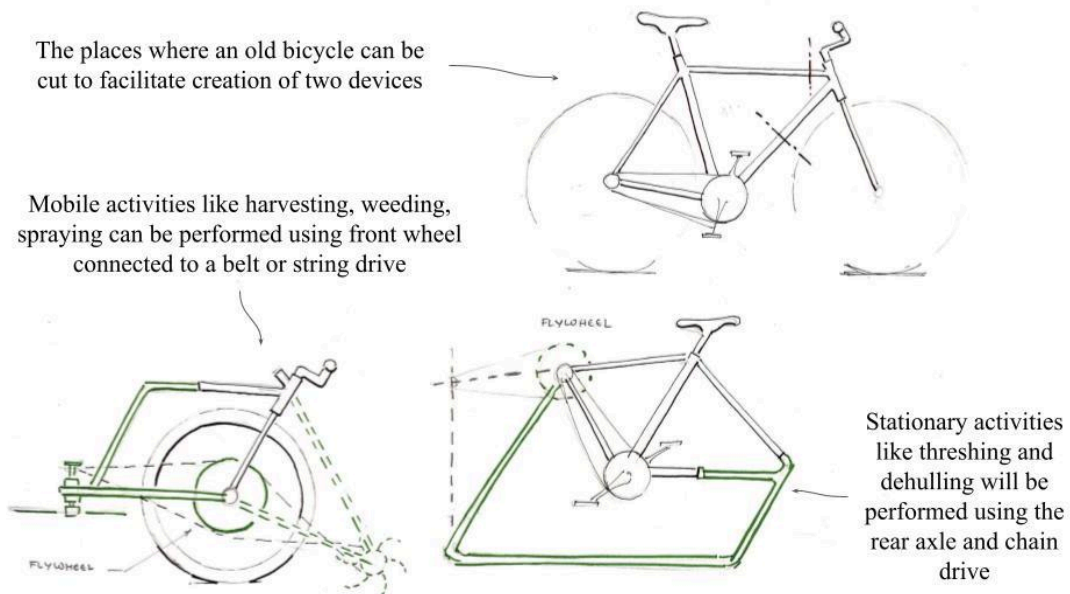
Using a bicycle frame and chain drive without wheels
